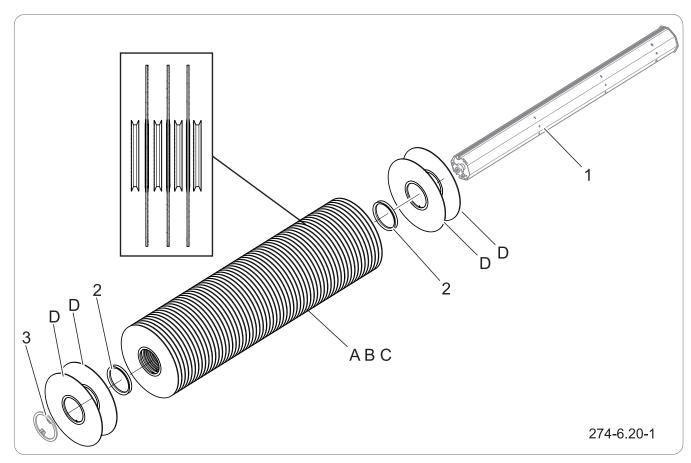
A roller brush with straight segments (1) - shaft (2) - spacer ring (3) - closing ring (A), (B), (C) -brush segments depending on the hardness
